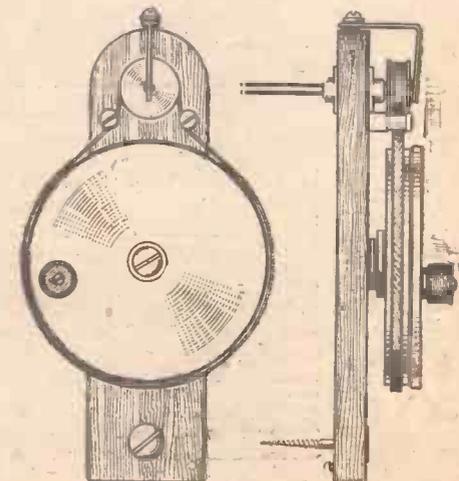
Showing the construction of a shuttle, and details of the spring-loaded socket.
